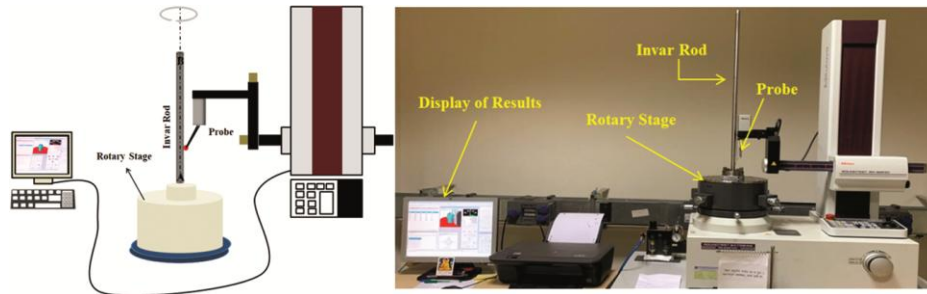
Schematic of form tester (roundness measuring machine, RA-2200 CNC) and the actual setup.
